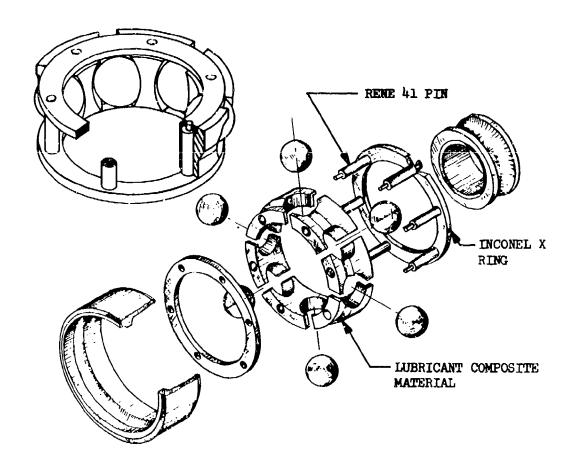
BALL BEARING LUBRICANT COMPOSITE SEPARATOR
